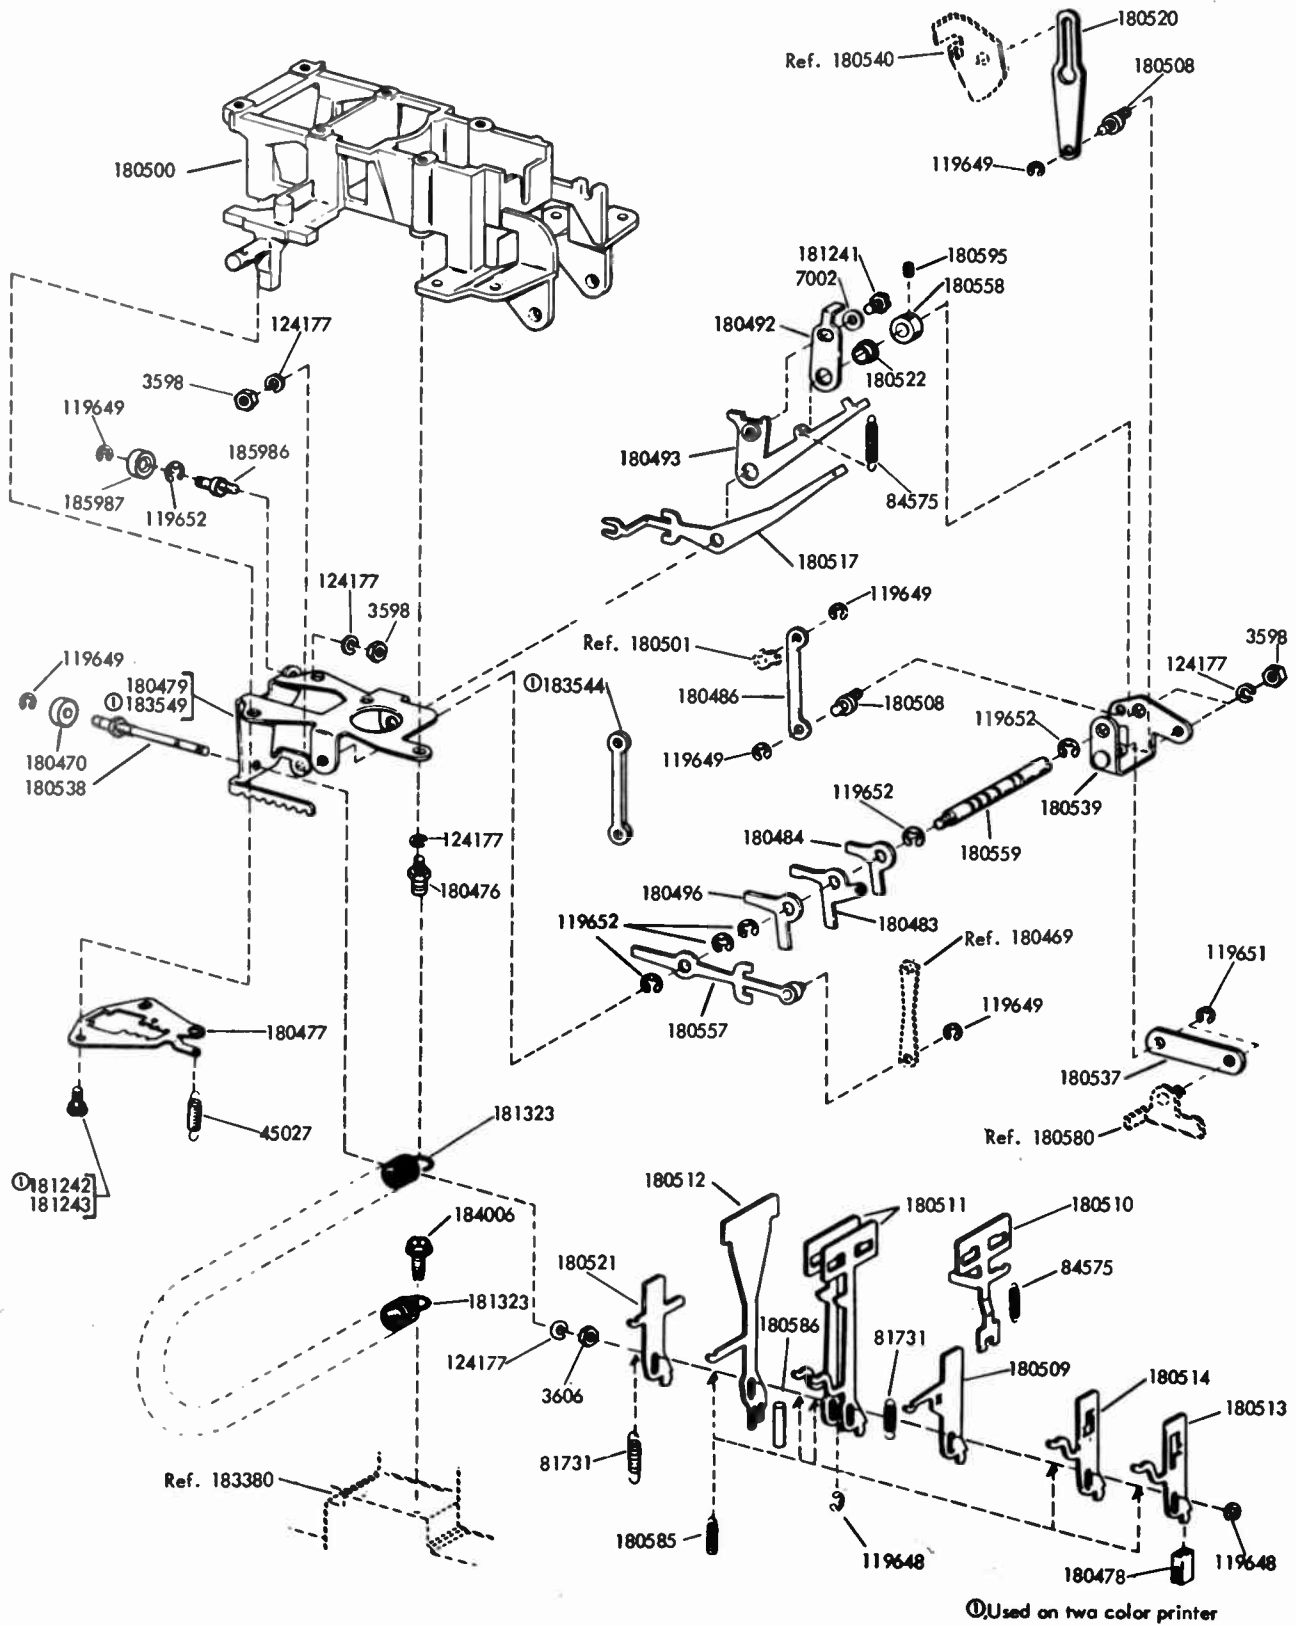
CARRIAGE LOWER PLATE MECHANISM
